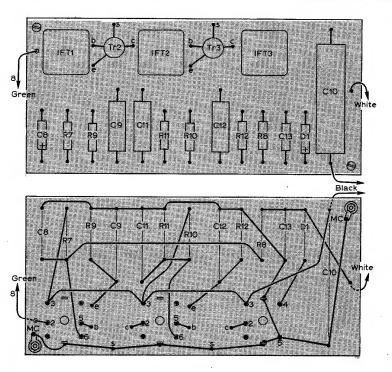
Component layout and wiring details of the i.f. circuit board  $3\frac{3}{4} \times 1\frac{3}{4}$  in.
